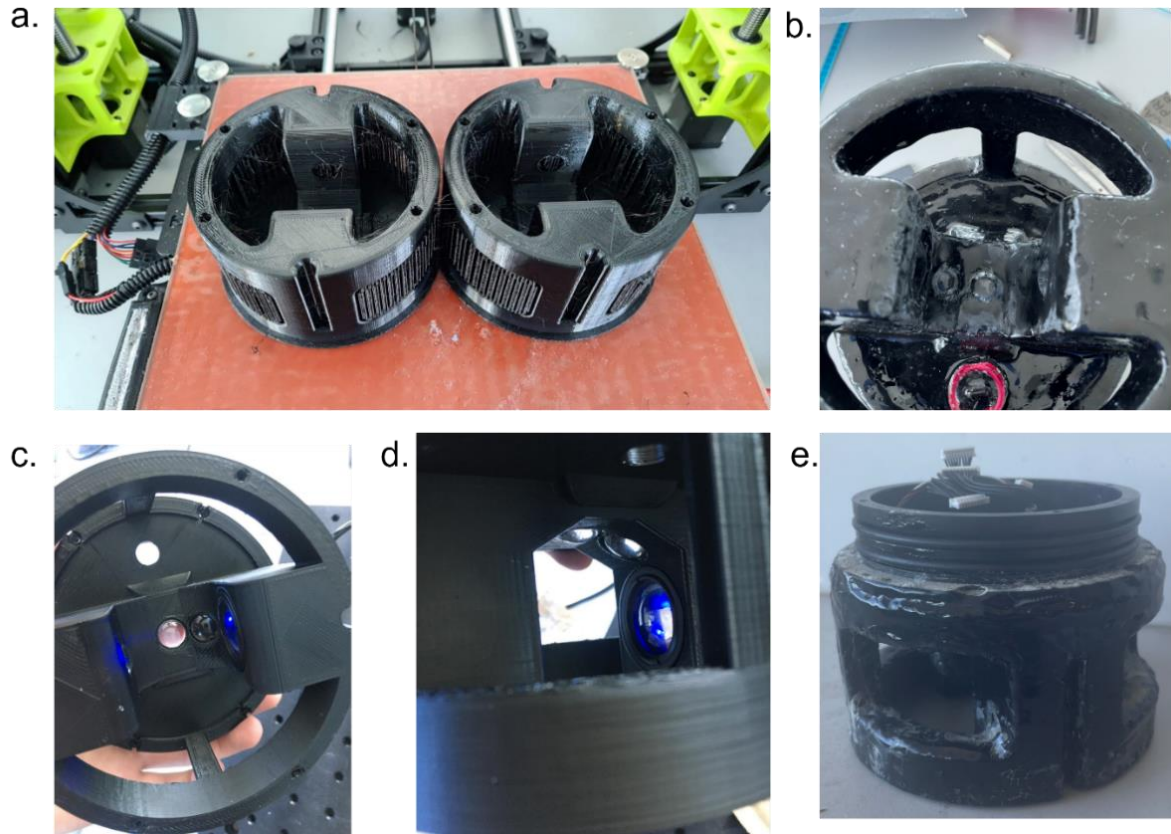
FDM 3D printed optical heads (a) two optical heads printed in Lulzbot Taz 6 using PETG filament (b) epoxy coating on outer surface to waterproof 3D print (c) underside view of optical head with lenses fitted (d) side view of optical head with lenses fitted (e) optical head with epoxy coating.
